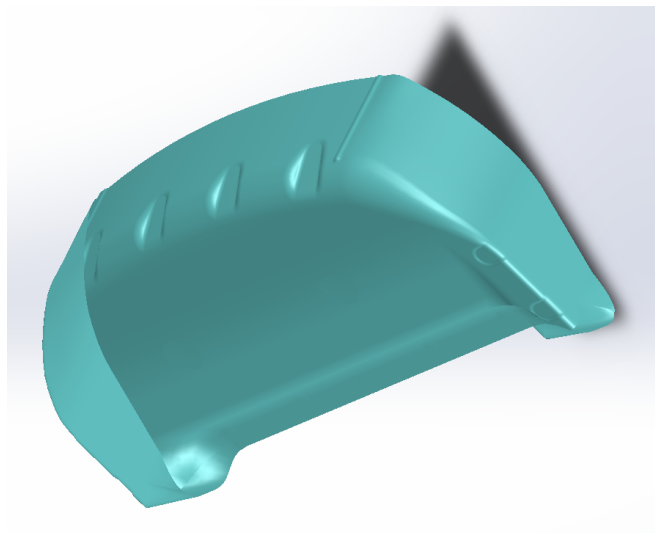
CAD model of the forming surface for the initial seat base test.
